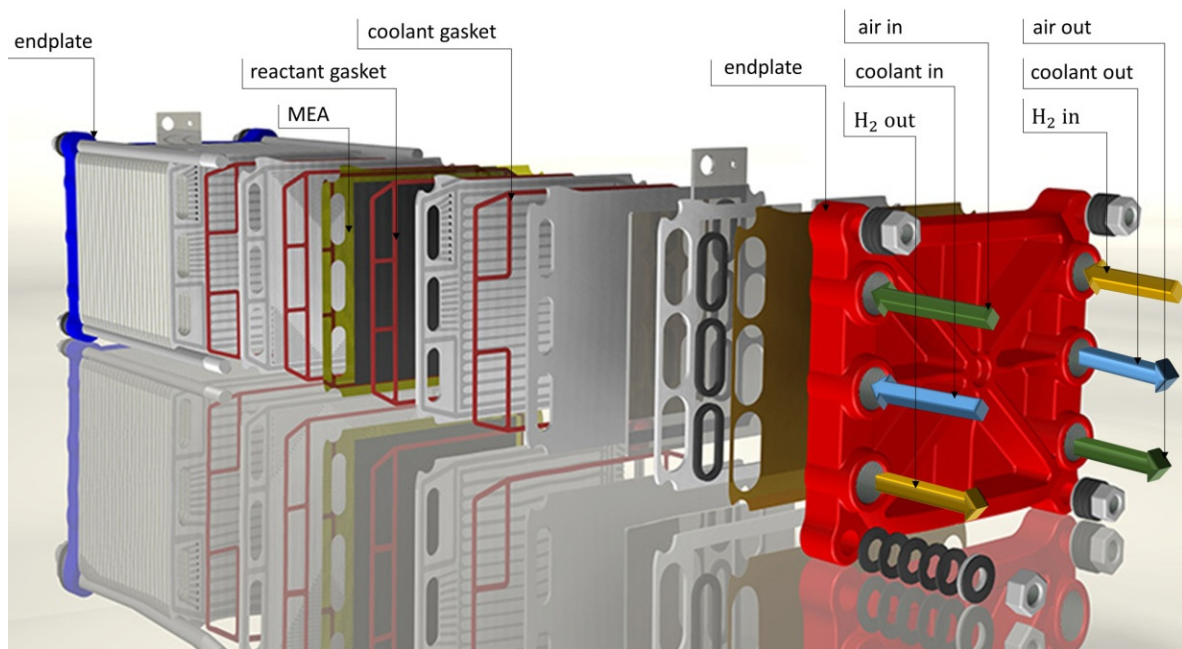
CAD-exploded view of a ZSW fuel cell stack.
